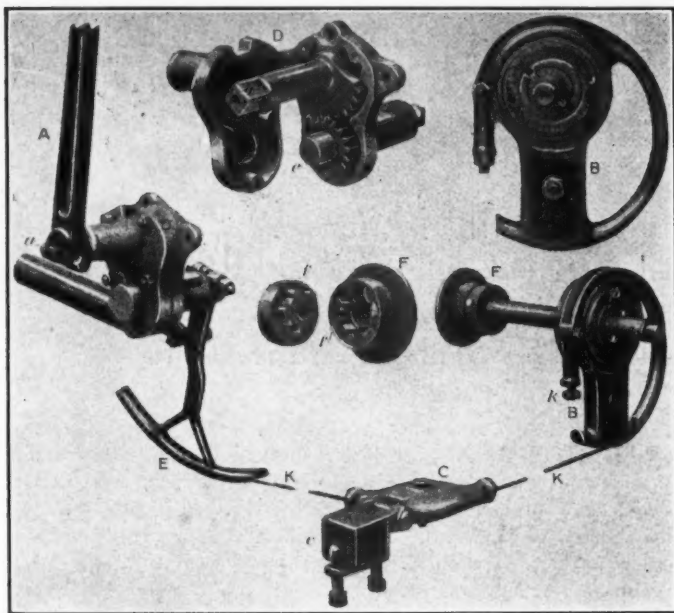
Arrangement and details of the improved Rofill mechanical motor starter, which is making headway in Europe
